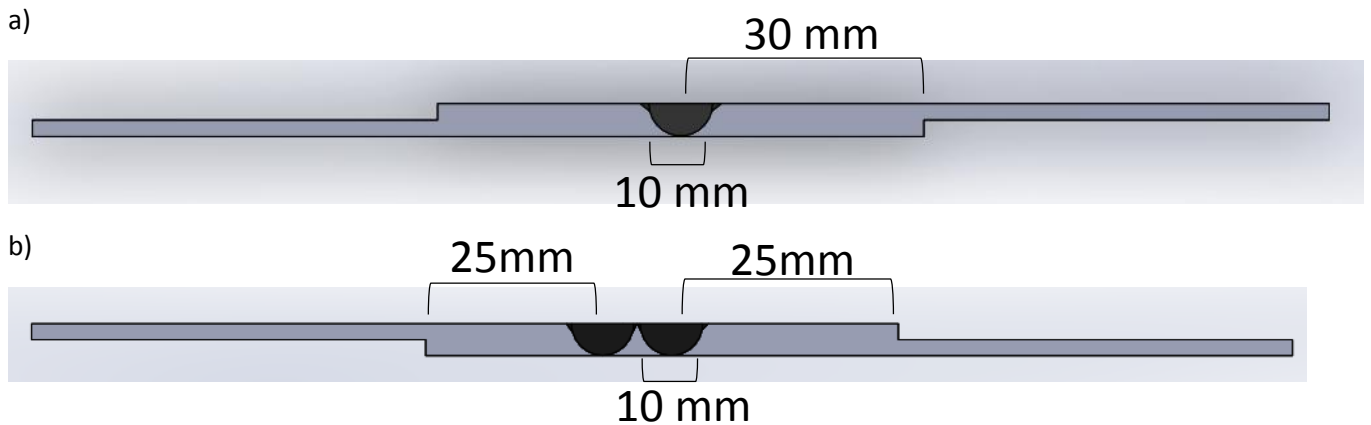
Front View of welded joint with dimensions in mm: a) one pass; b) two passes.
